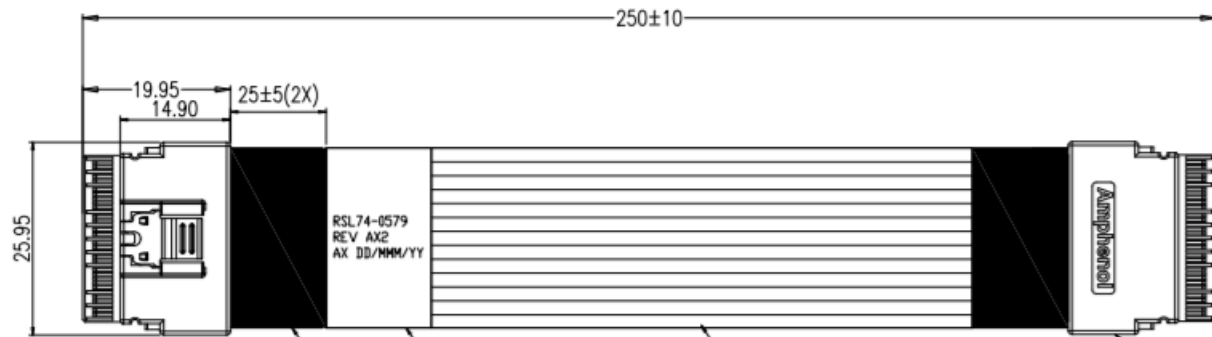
Mechanical Drawing of the Slim-Line SAS Cable
